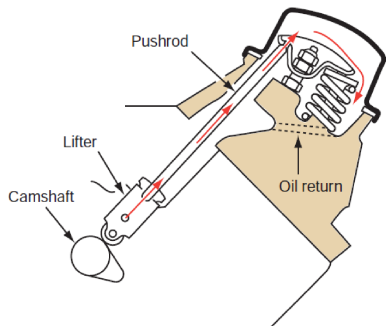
The valve train for one cylinder of an overhead valve engine
